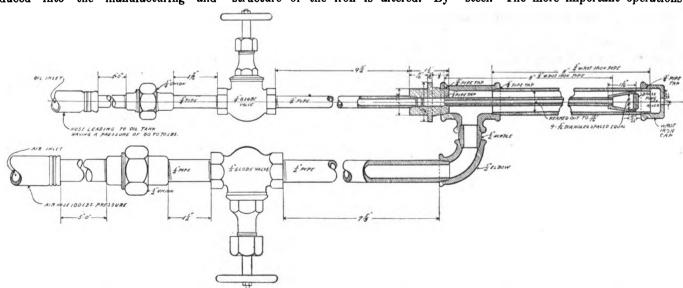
DETAIL AND PARTIAL SECTIONAL VIEW OF THE BURNER WITH ALL DIMENSIONS AND INSTRUCTIONS FOR MAKING
